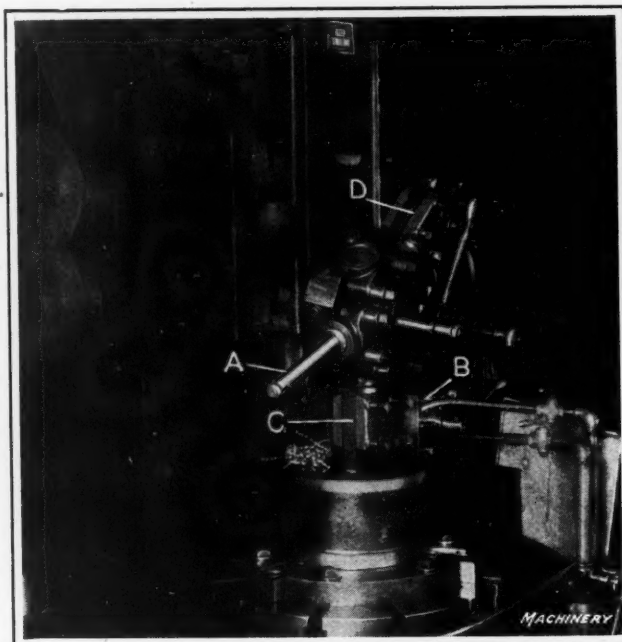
Vertical Turret Lathe engaged in machining Cream Separator Bowl Forgings
